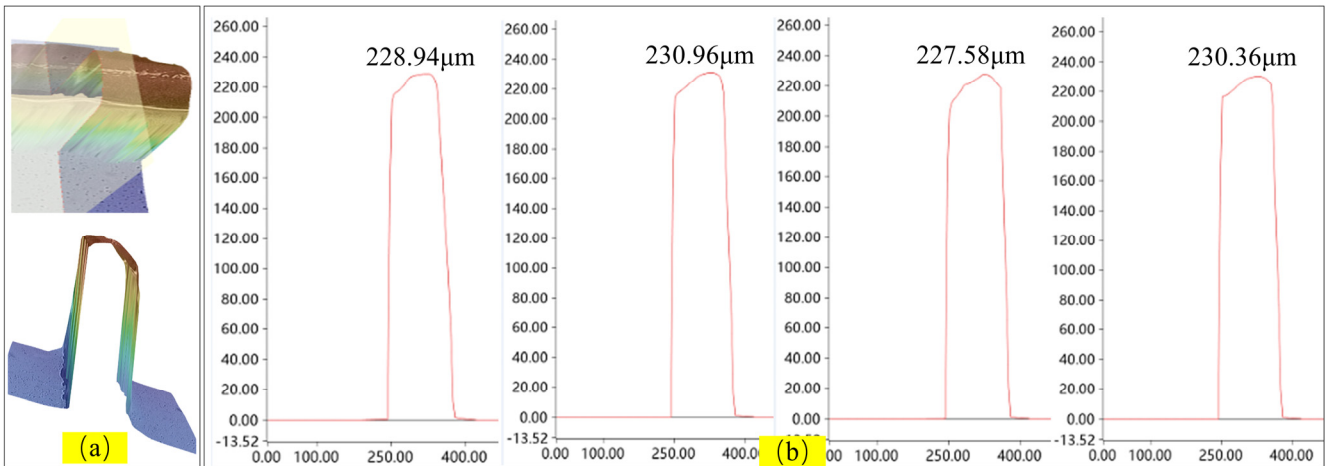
Longitudinal section outline of micro ‘wall’ structure: (a) The 3D shape of the section, (b) Profile measurement of longitudinal section
